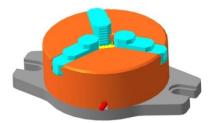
Adjustable locating-and-clamping module for locating of parts according to external cylindrical surfaces.
